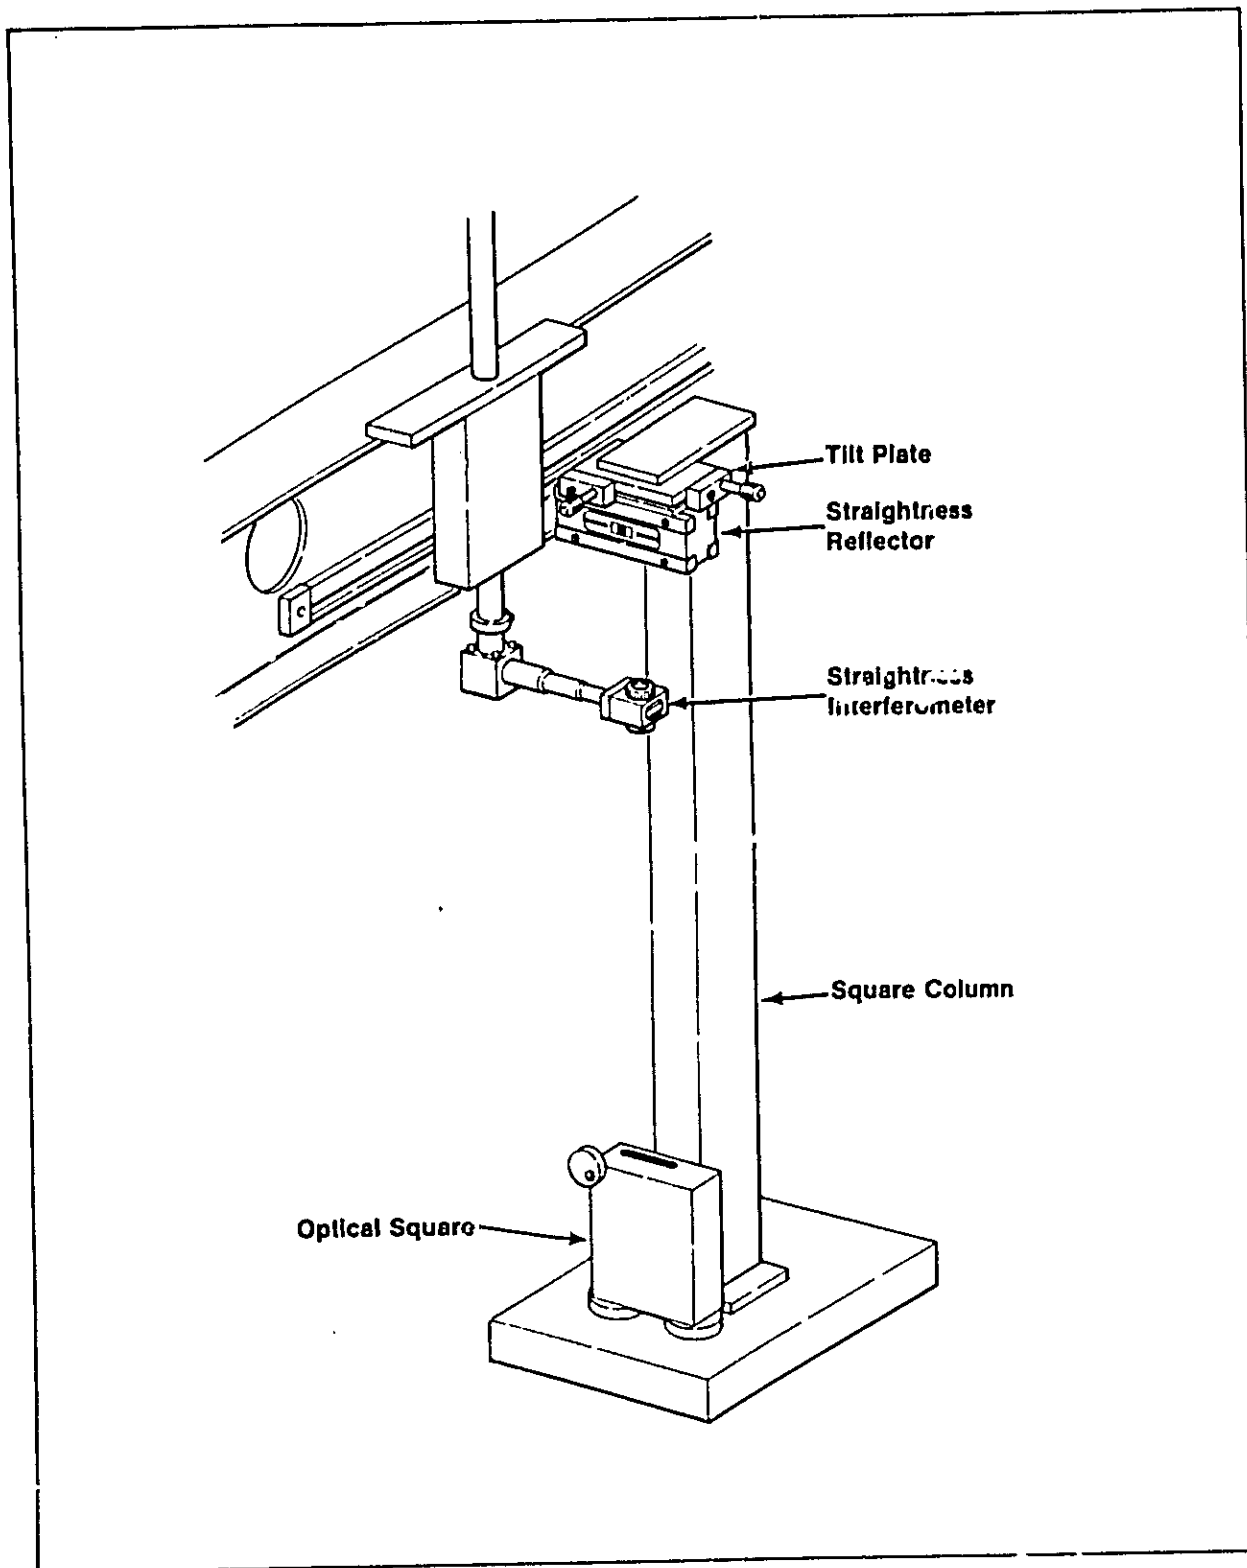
Typical Setup for Straightness and Squareness on a Coordinate Measuring Machine or Construction of a Machine Tool
